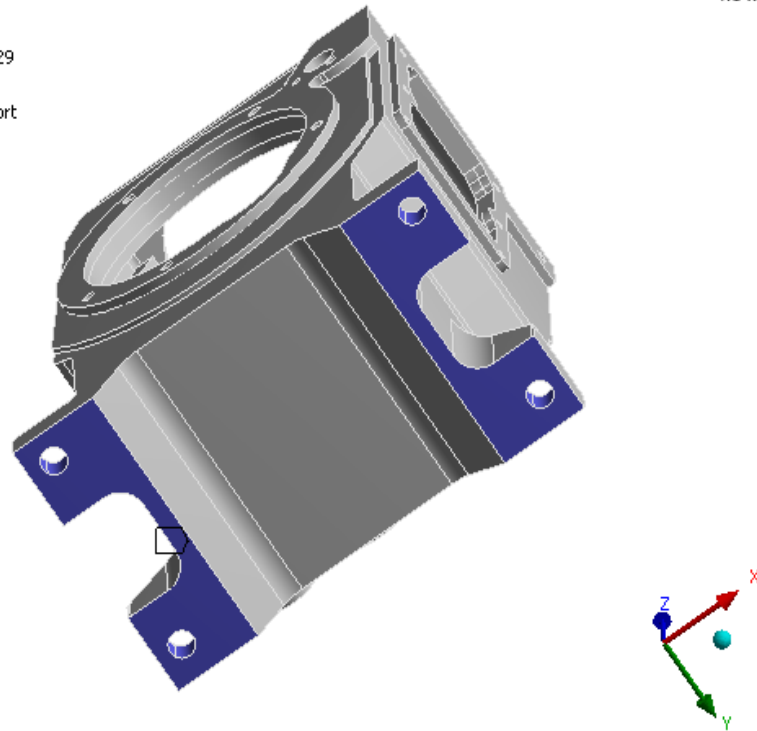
Fixed support on crankcase of single cylinder diesel engine.
